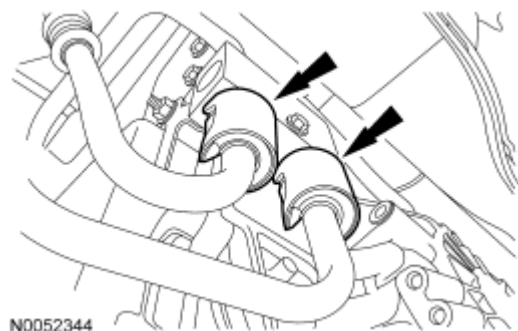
Locating Secondary Latches On Transmission Fluid Cooler Tubes
